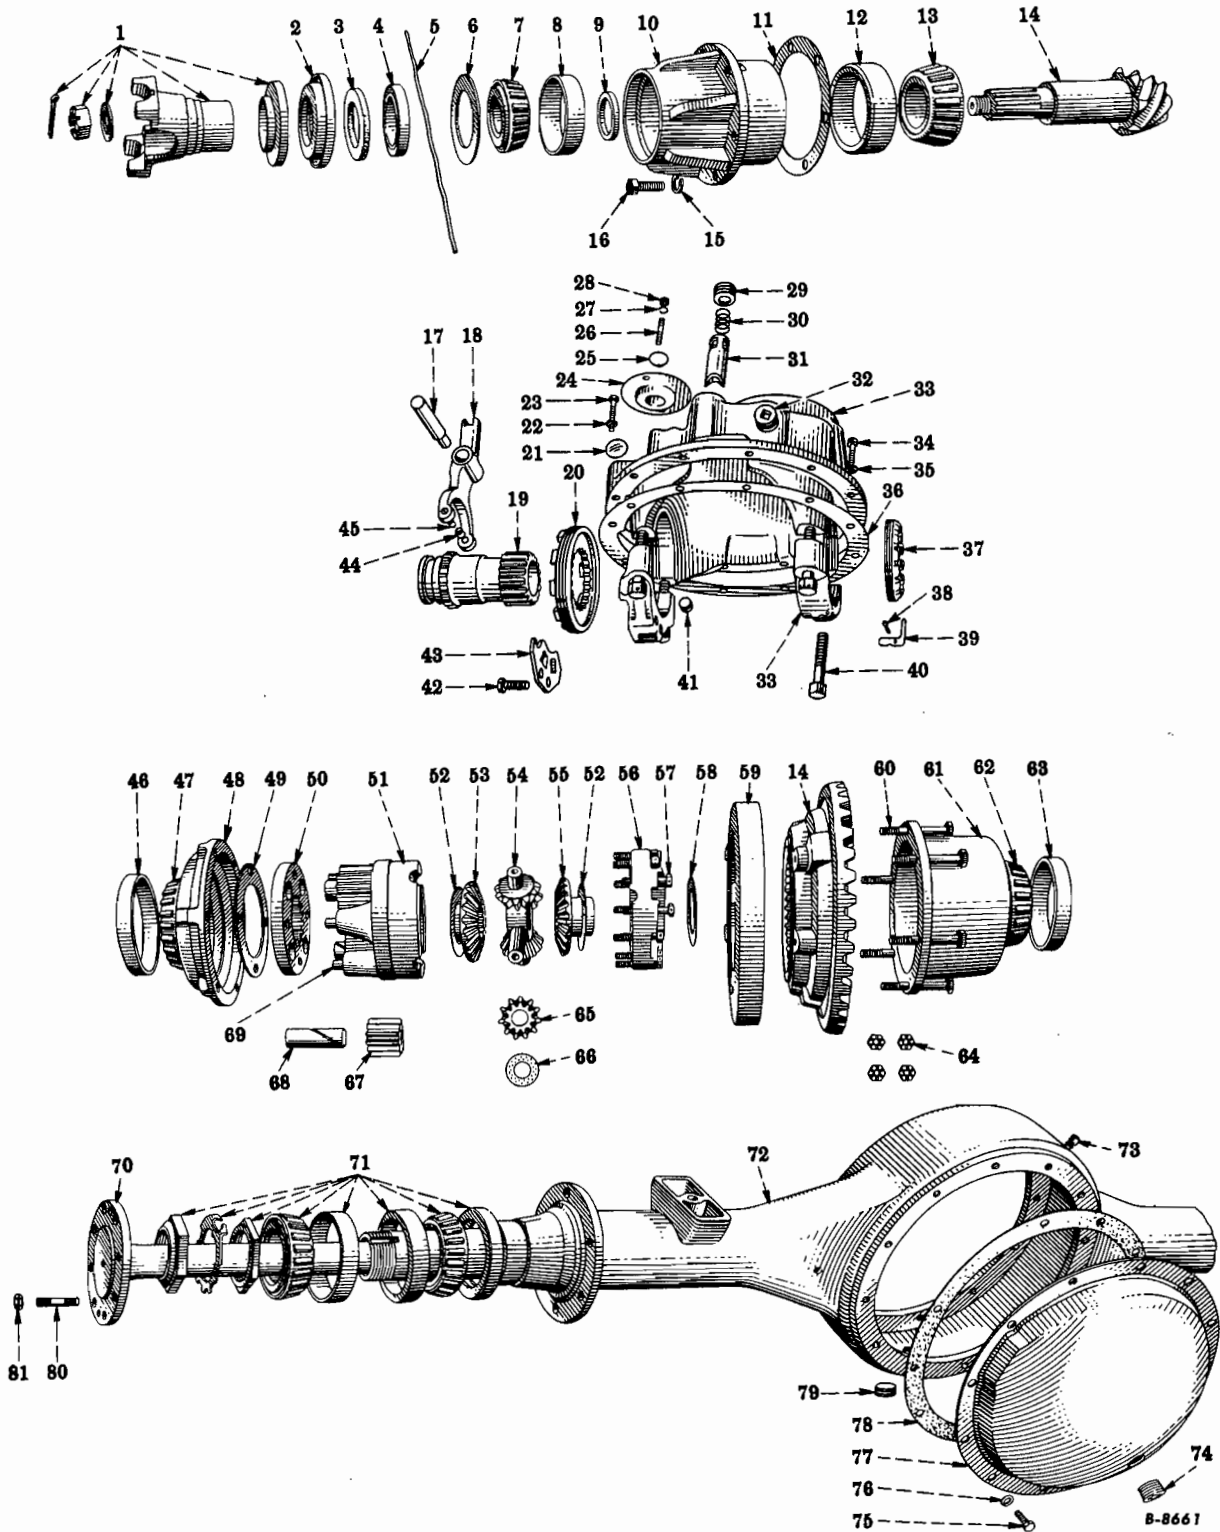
REAR AXLE ASSEMBLY (Eaton Model E-13 600, Two-Speed, Codes 1410, 1411, 1453)
